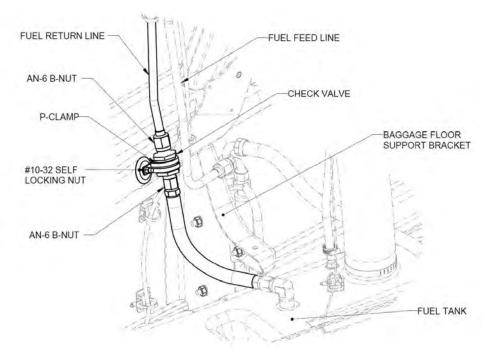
FUEL RETURN LINE ASSEMBLY LOOKING AFT, RHS
